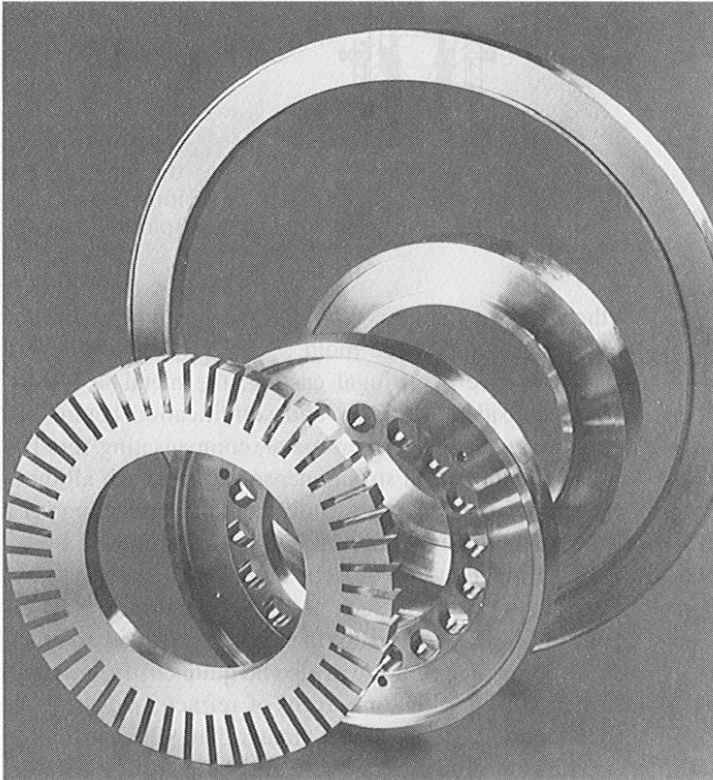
Electrical products (collector rings, slip rings, and rotor end rings) that have been centrifugally cast from aluminum and copper. (Courtesy of The Electric Materials Company.)
